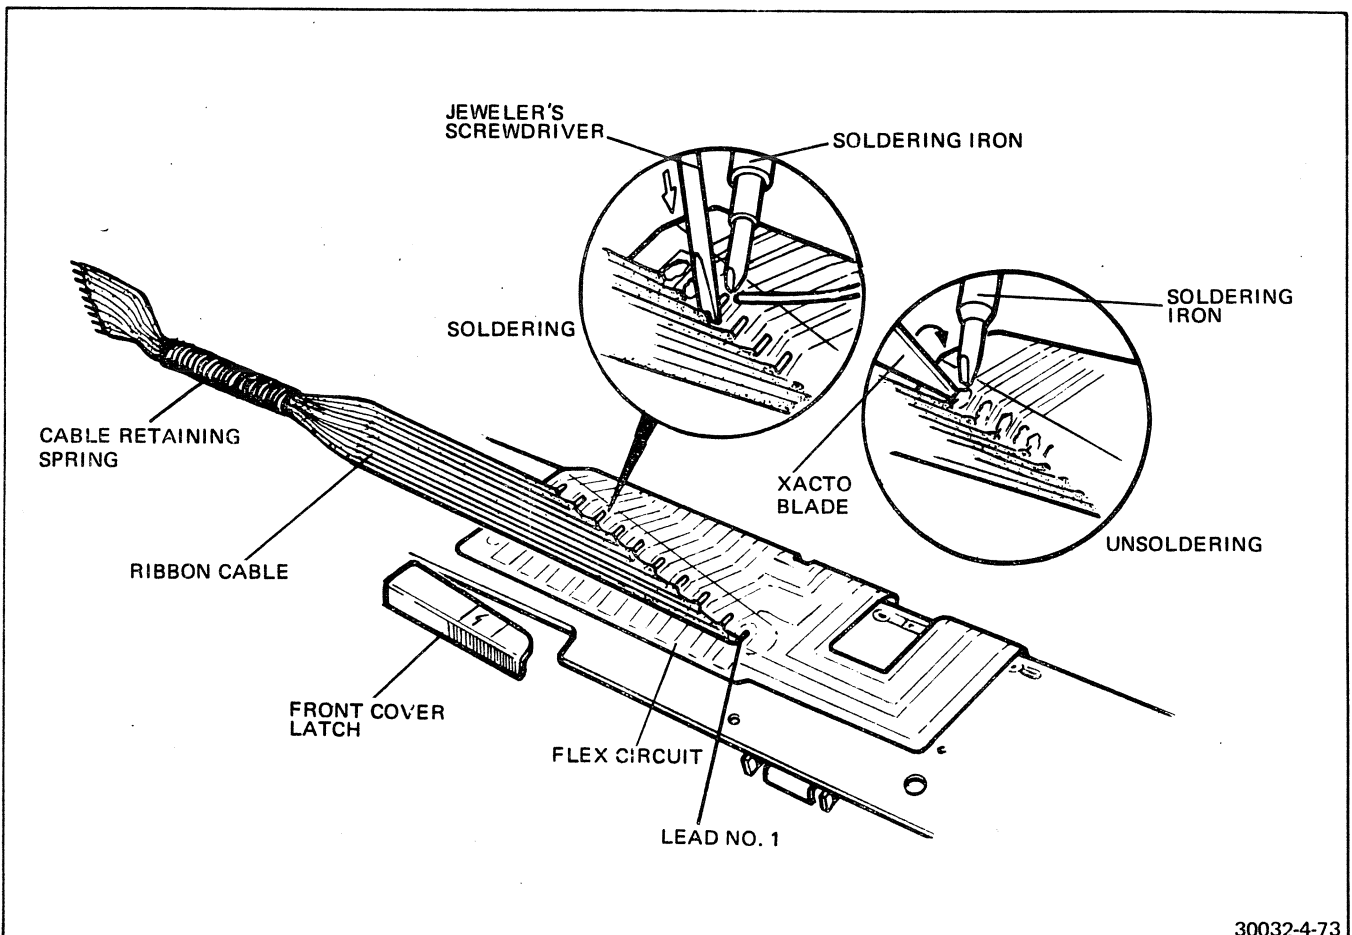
SOLDERING/UNSOLDERING RIBBON CABLE
